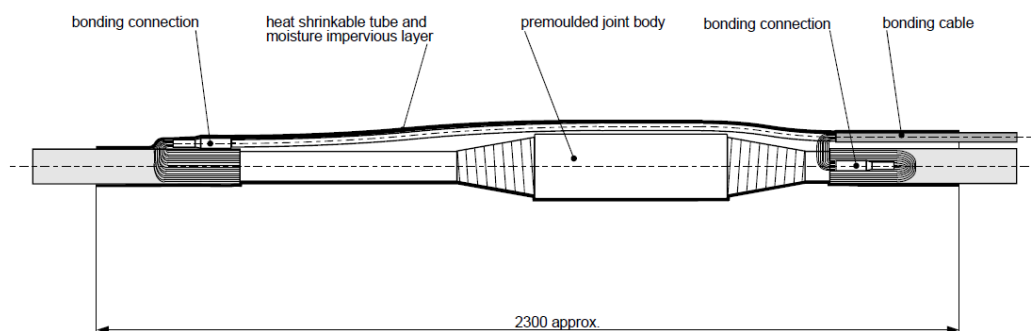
Premolded Sectionalizing Straight Joints, used for connection of cables and cross bonding of screen.
